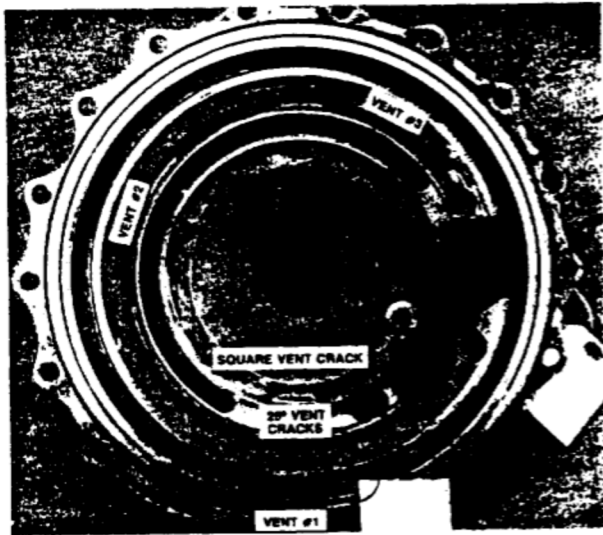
TYPICAL EXHAUST HOUSING CRACKS.
